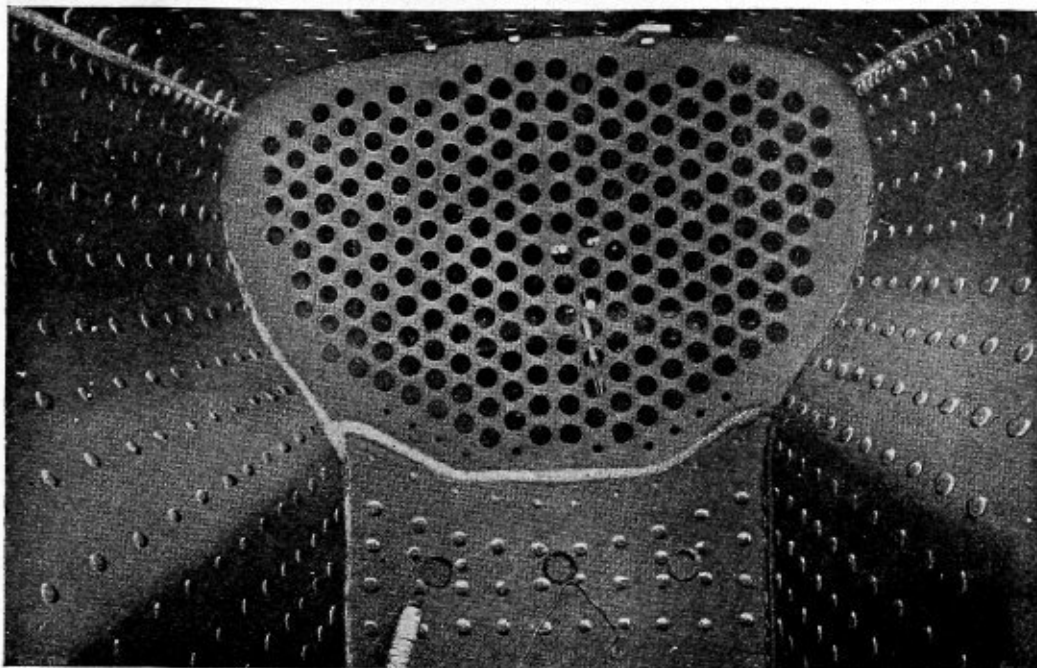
Interior of Locomotive Firebox; Back Tube Sheet Welded by Arc Process
